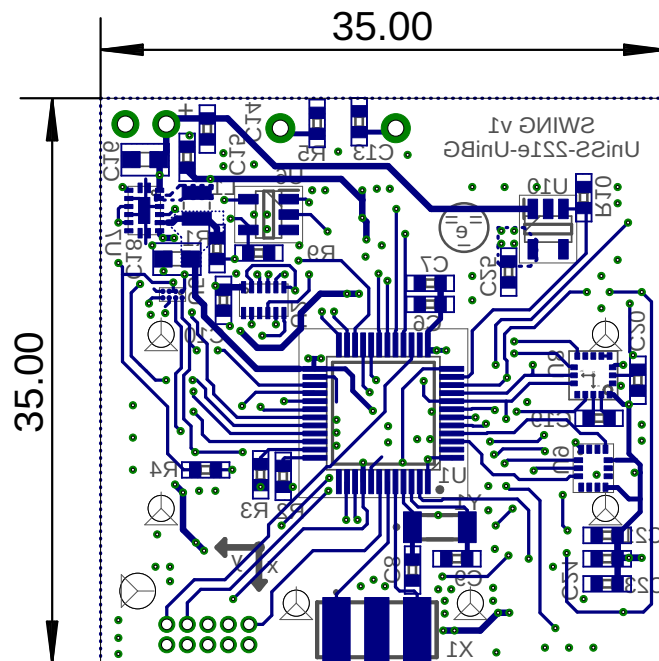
Bottom view of the SWING layout (units in millimeters).
